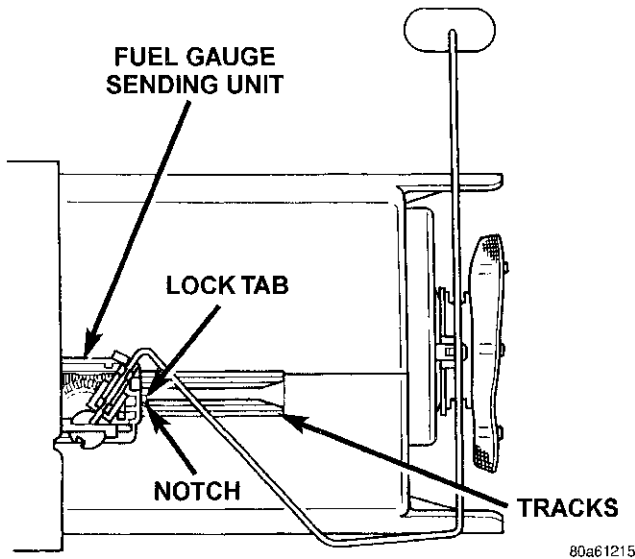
Fuel Gauge Sending Unit Lock Tab/Tracks
